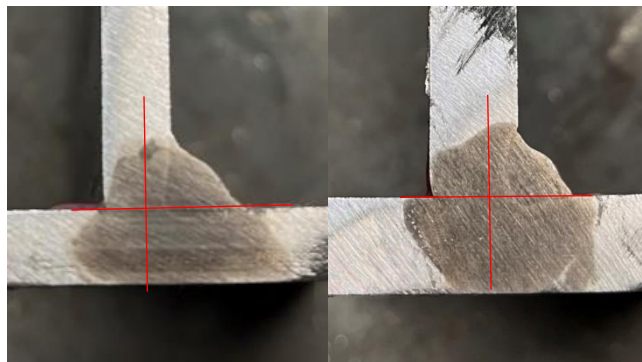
Sample A macroetch test vs. Sample B macroetch test for fillet weld bending experiment.
